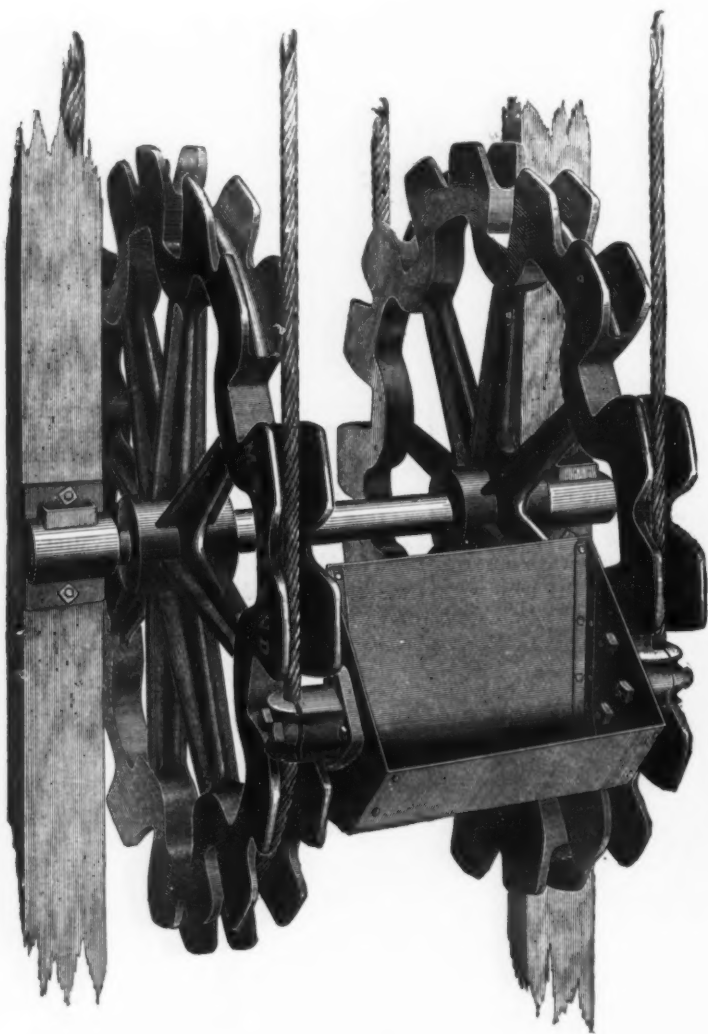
Double-Strand Steel Cable Bucket Elevator.
